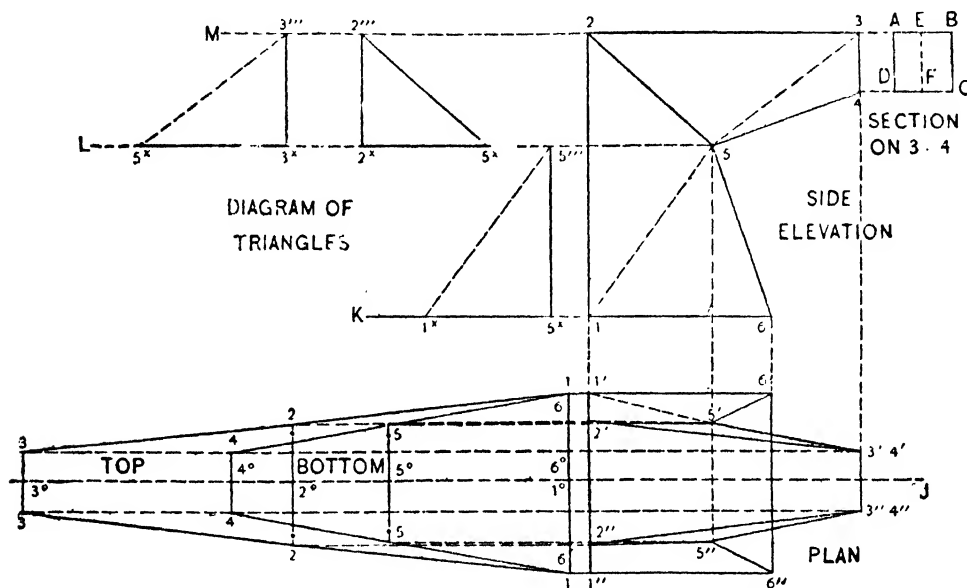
Plan, Elevation and Patterns for Top and Bottom
